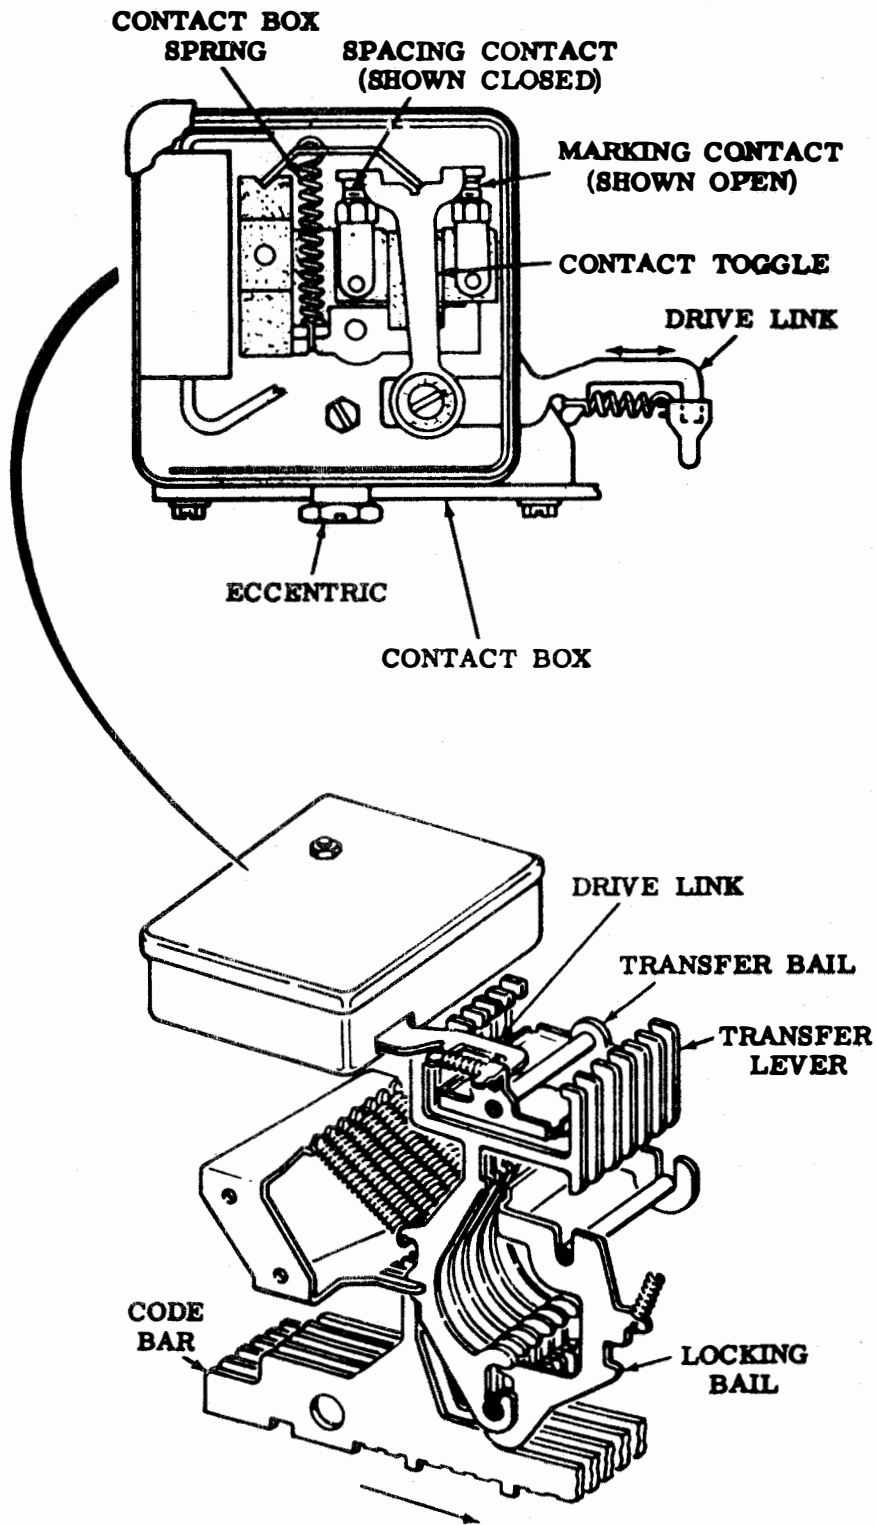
Transfer Lever, Contact Box Mechanism Signal Generator Drive Link
